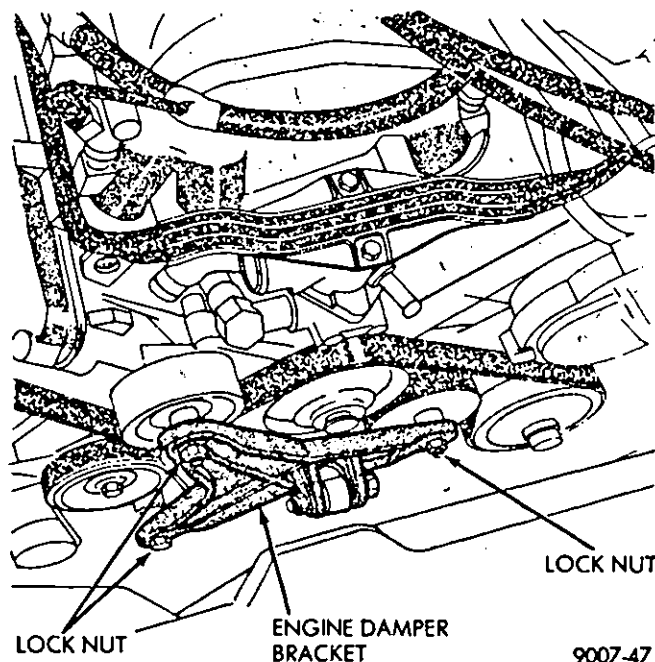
Engine Damper Mounting Bracket—3.0L Engine
